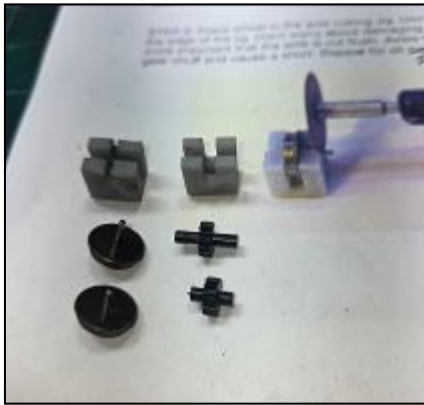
PHOTO ABOVE: This is the first step in the conversion, trimming the gears and the axles to 3-foot gauge. This involves disassembly of the RSC-2 and removing the trucks. There are hints in the instructions to accomplish this. A motor tool was used to trim the axles and the gears. Once done, the wheels are pressed back onto the axels and they self gauge to 3 feet. The jig is included in the kit.
